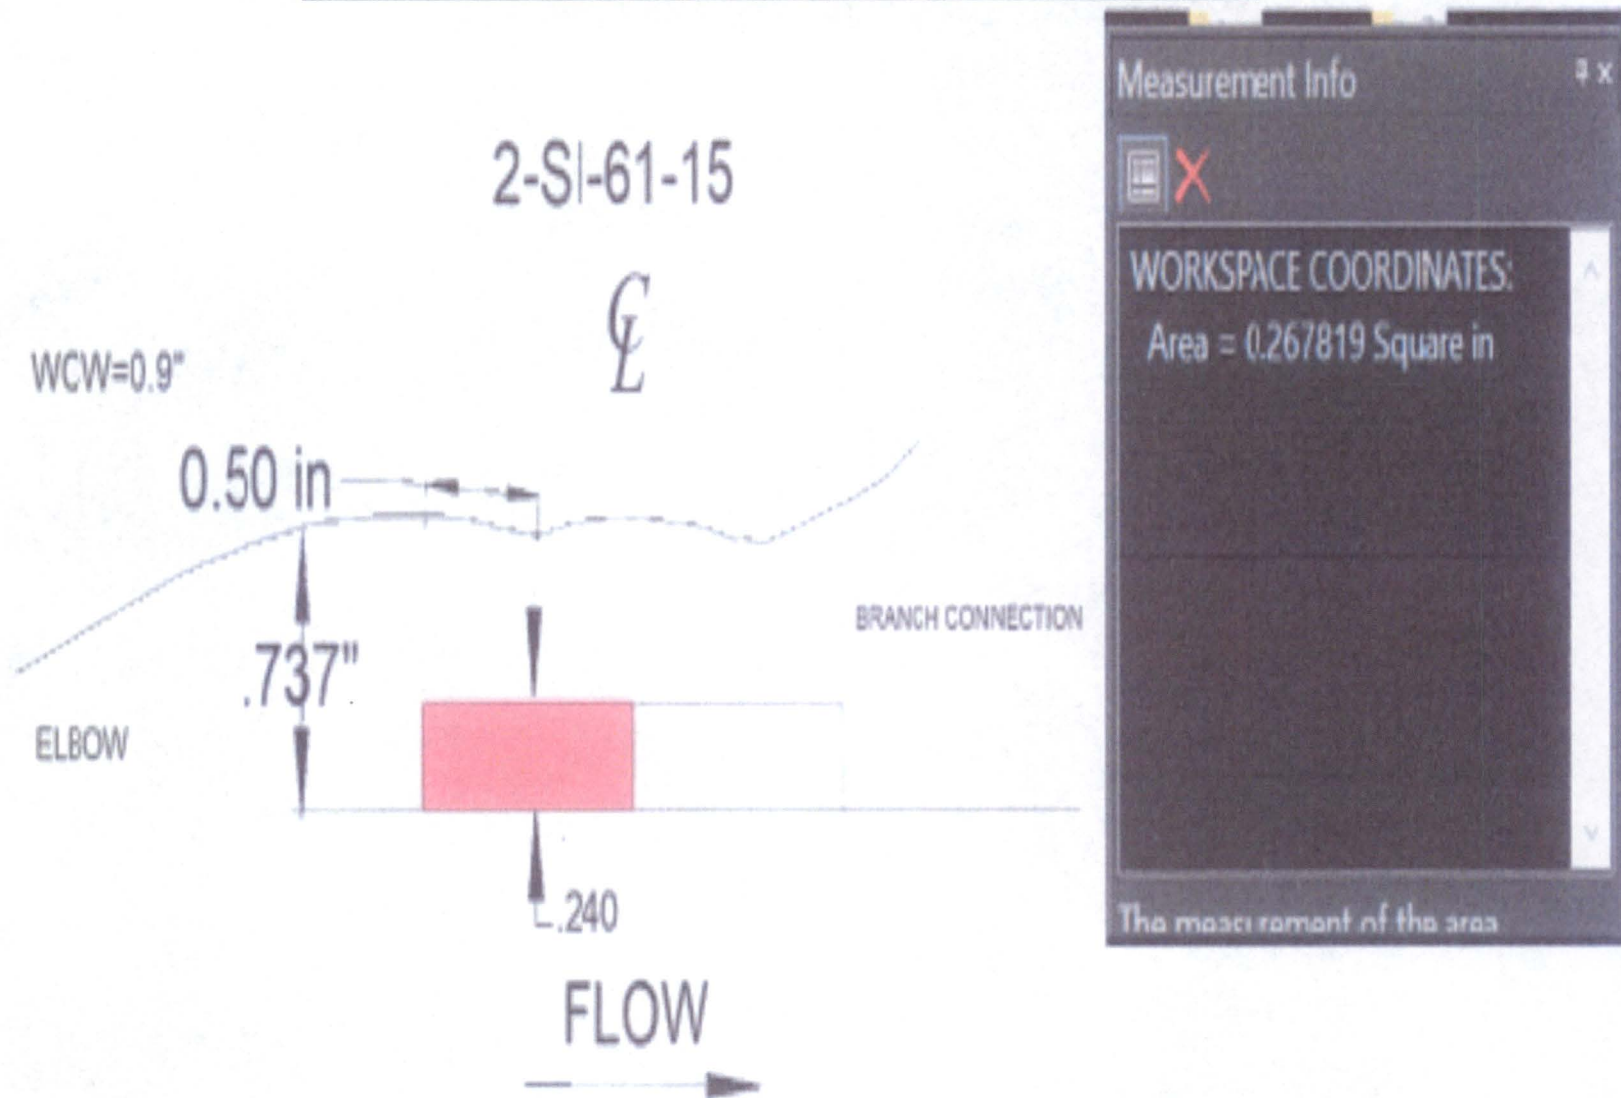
Weld 2-SI-61-15 (Extracted from Reference DRAWING 2A-53)
